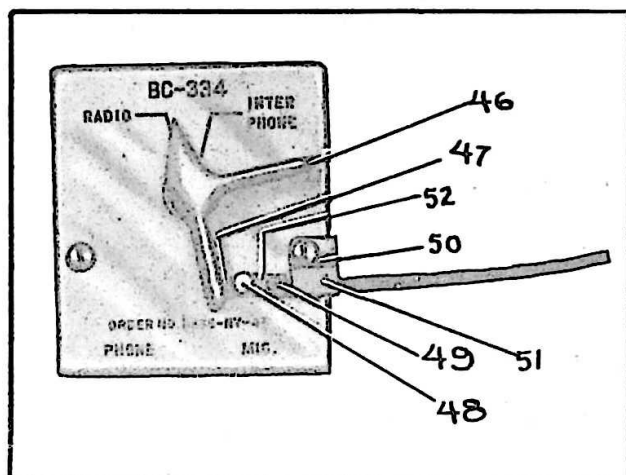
Interphone Control Box BC-334 (Master) with Control Shaft MC-166-A Attached
